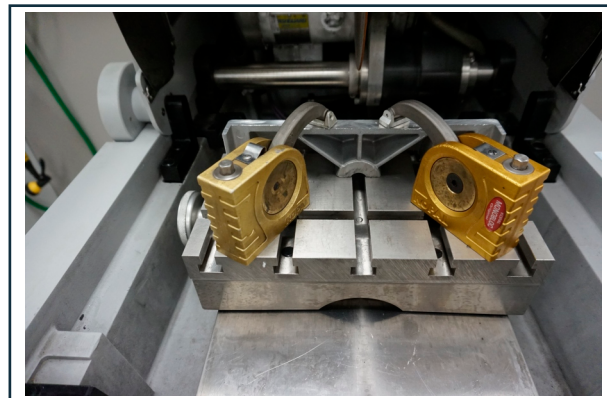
Aluminum Stand Fixture using Clamping Fingers on LECO CX300.
